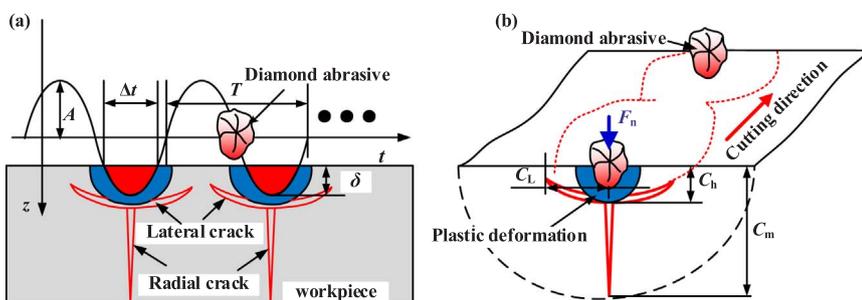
Material removal model of RUM. (a) periodic contact and separation between abrasive and workpiece, (b) scratching of diamond abrasive due to tool rotation.
